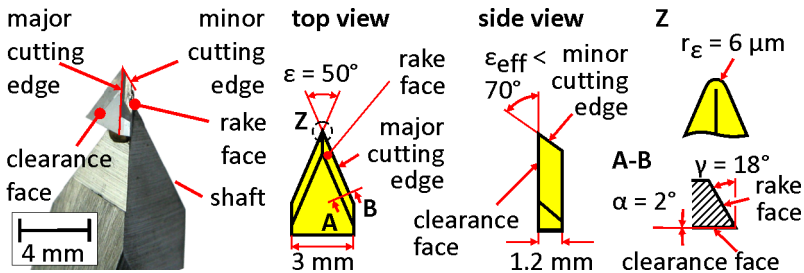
Diamond tools used for DMC of molds [Sch10]
